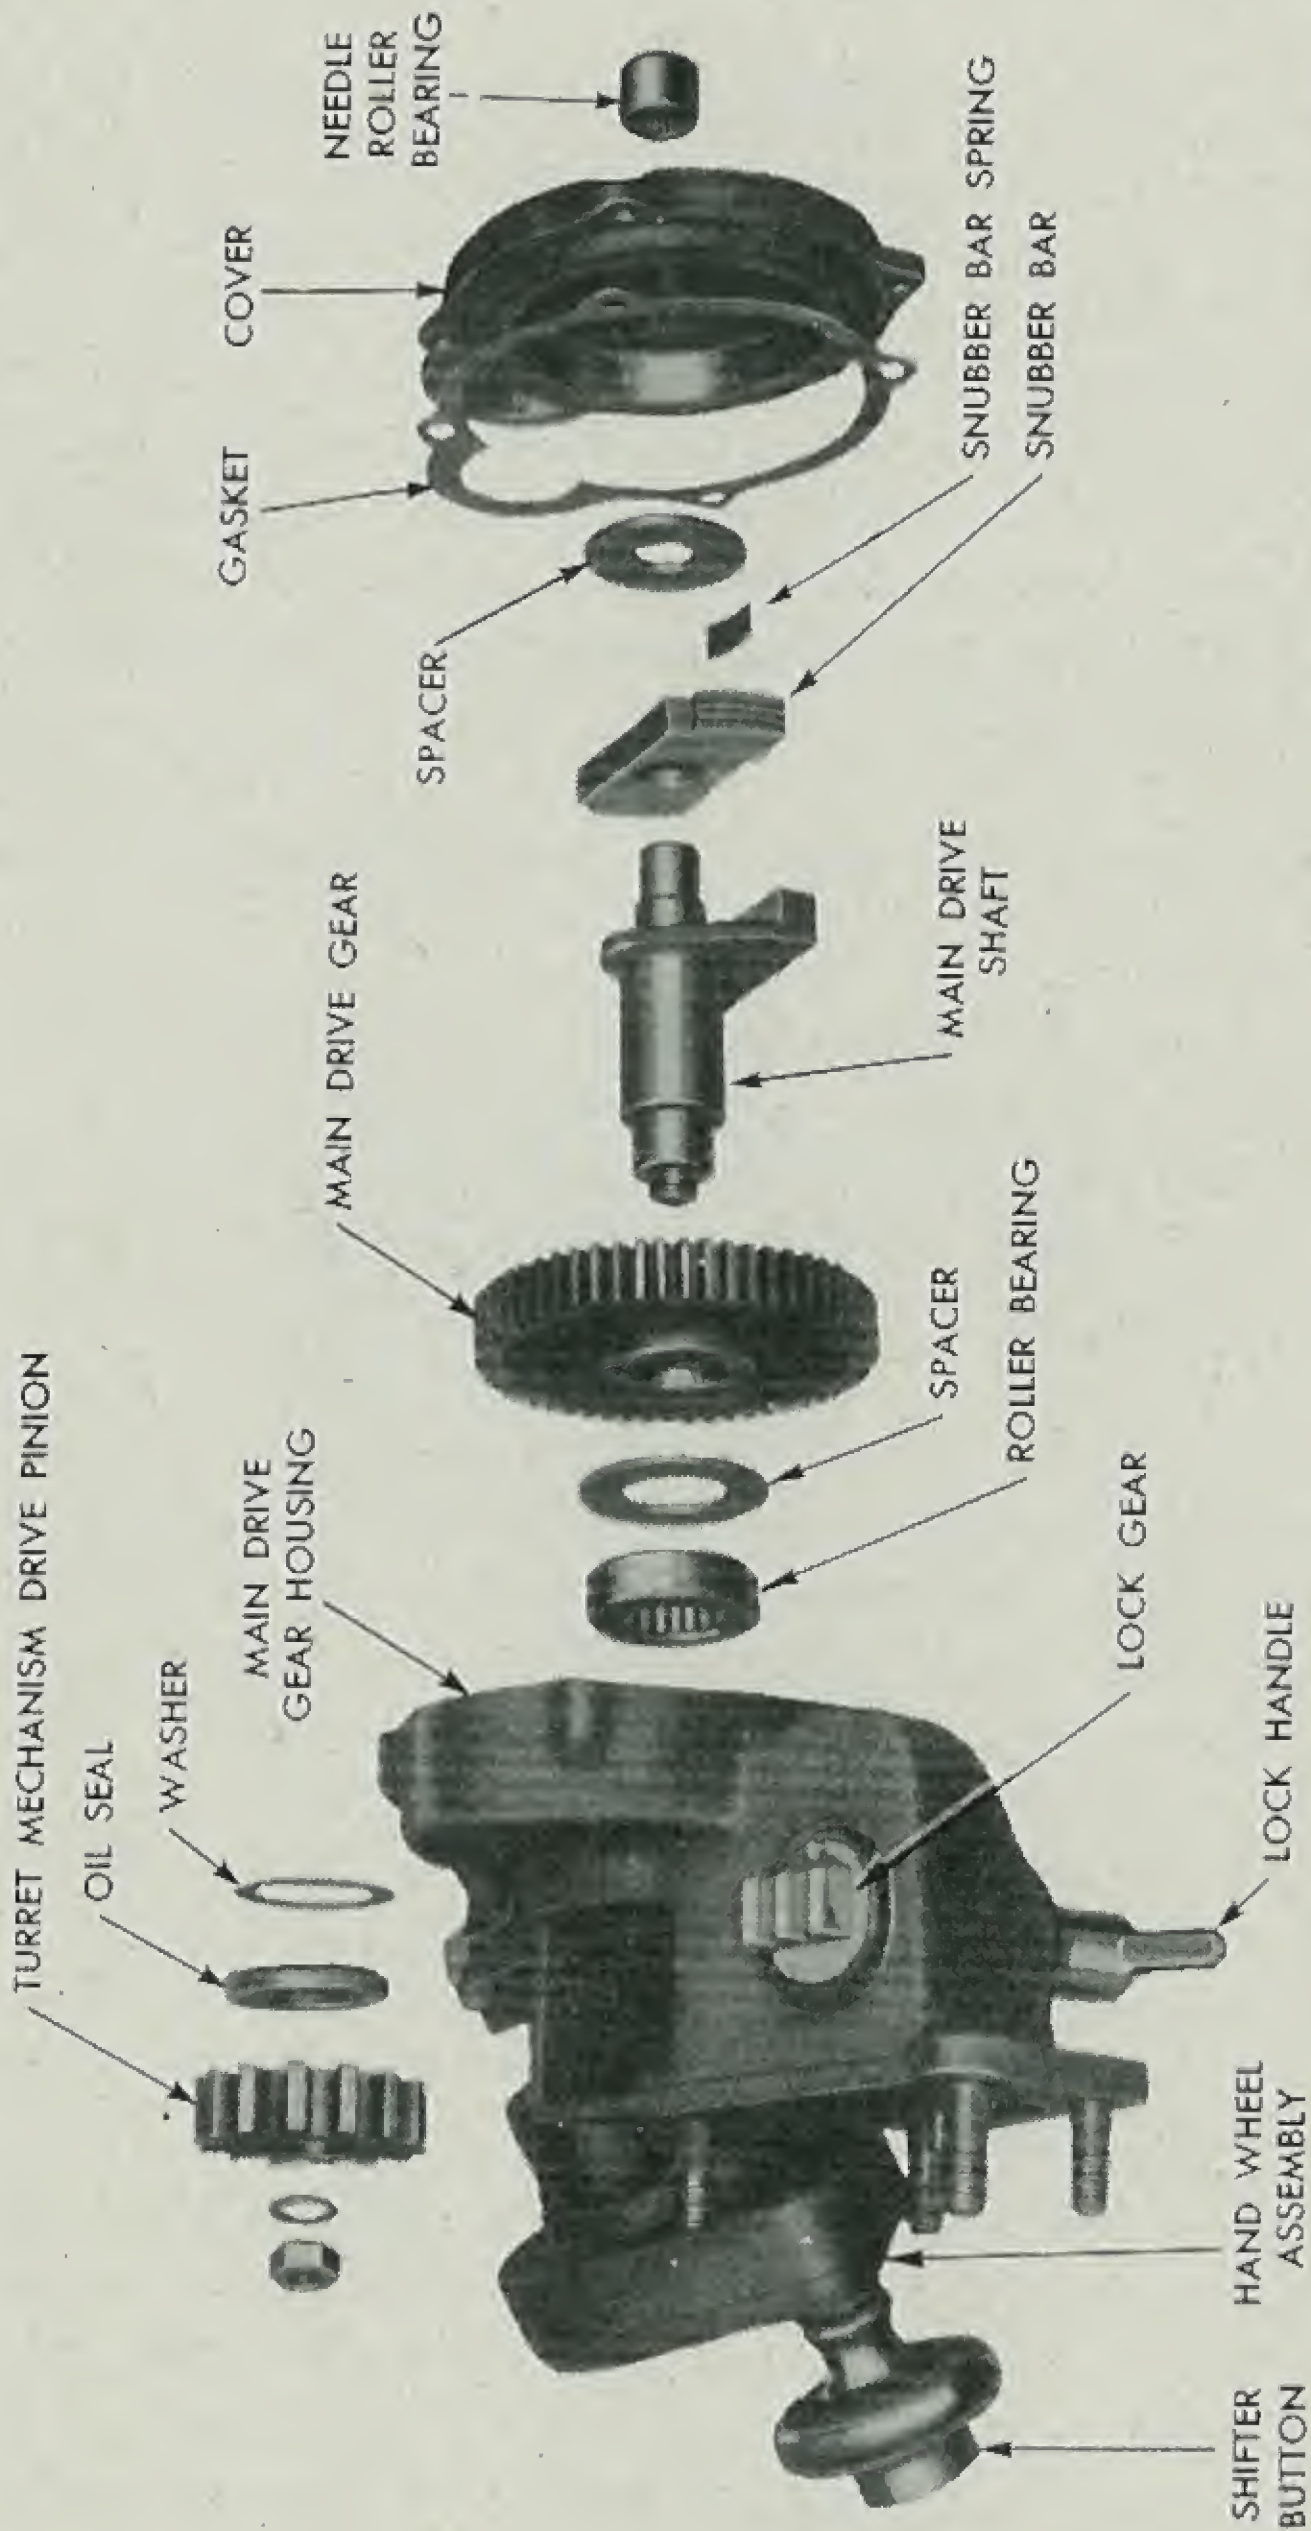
Two-speed Traversing Mechanism, Main Drive Shaft, Disassembled
